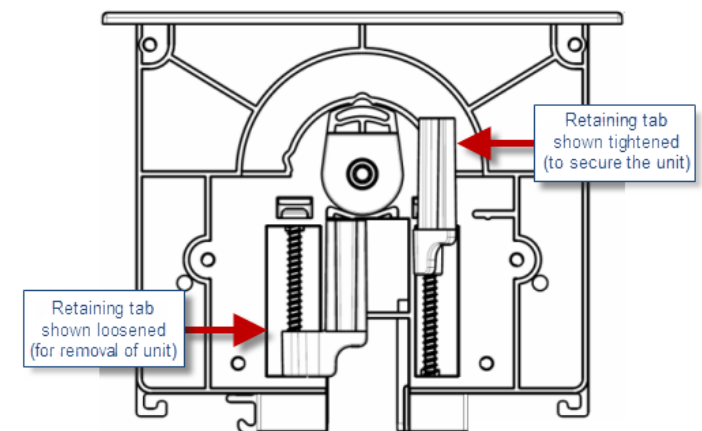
HYDRAPORT BASE ASSEMBLY (SHOWN MOUNTED) - MOUNTING SCREWS LOCATIONS
